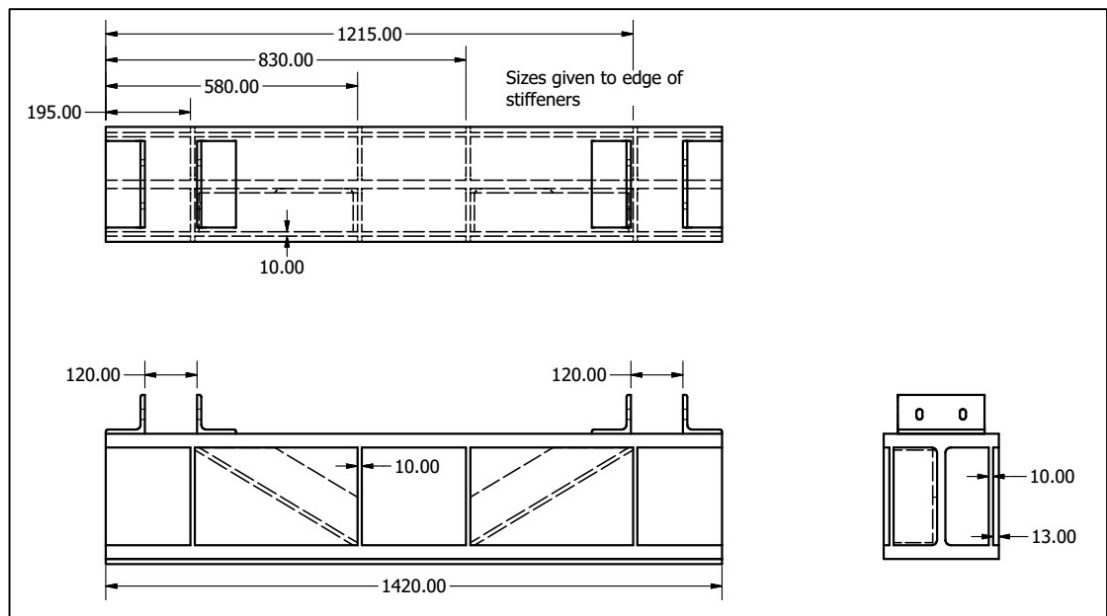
Plan and elevation drawings of upper crosshead all sizes in mm
